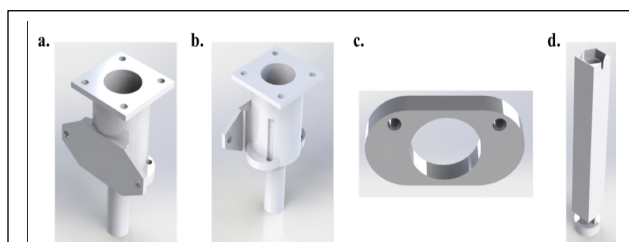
Syringe pump schematics: a. and b. Final syringe pump body design. Designed to fit directly onto the extruder plate of the Tronxy X1; c. Syringe holder designed to keep the syringe fixed to the syringe pump during printing; d. Syringe insert. Designed to fit rubber syringe gasket for improved performance. The M5 hex nut is glued to the insert to ensure perfectly coupled movement.
